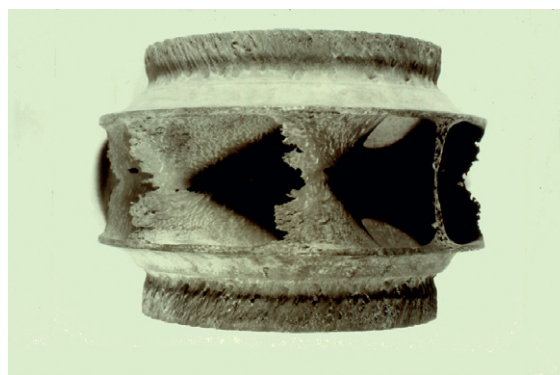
SRB-mediated sulfide corrosion of a gunmetal pump impeller.
